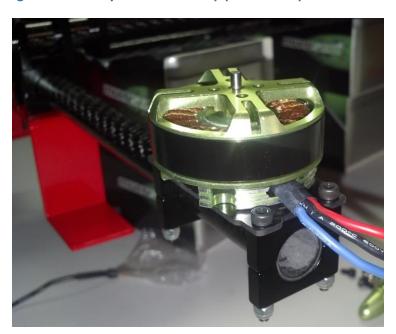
Attach the motor/motor mount to the motor-tube as shown and tighten into place
